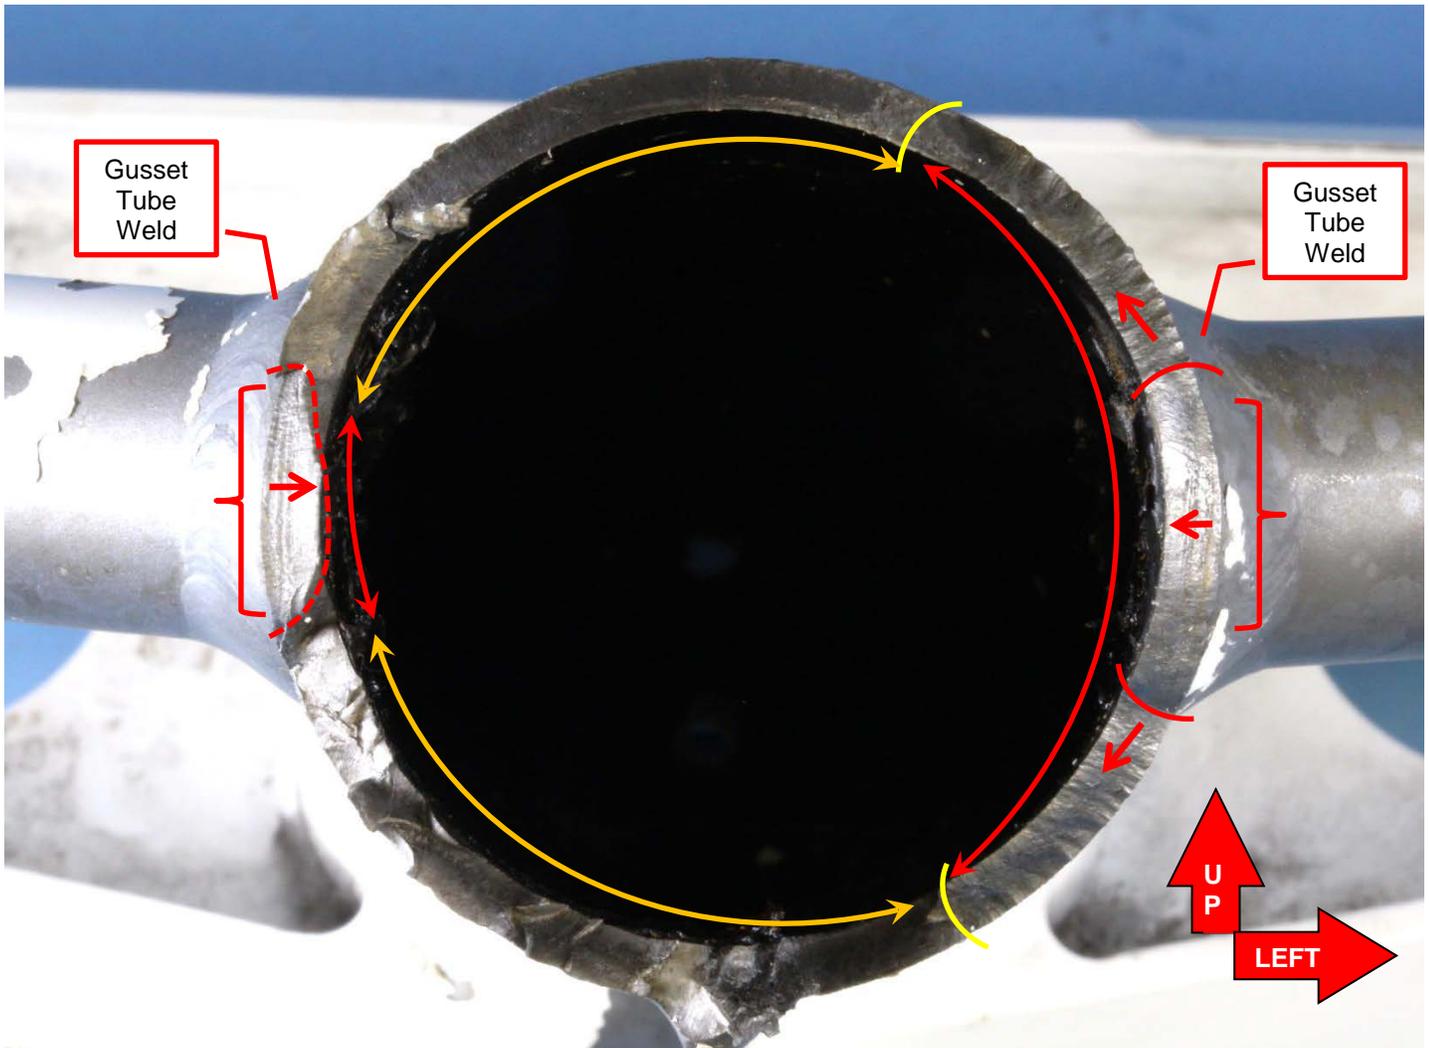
Looking aft at the fracture face. Double headed red arrows denote the reflective regions and orange arrow the overstress areas. Red brackets denote initiation locations of through the wall crack portions at the toes of the gusset tube welds. Circumferential extensions (two directions) of the left crack are between the red and yellow arcs. Arrows indicate local crack propagation directions.
